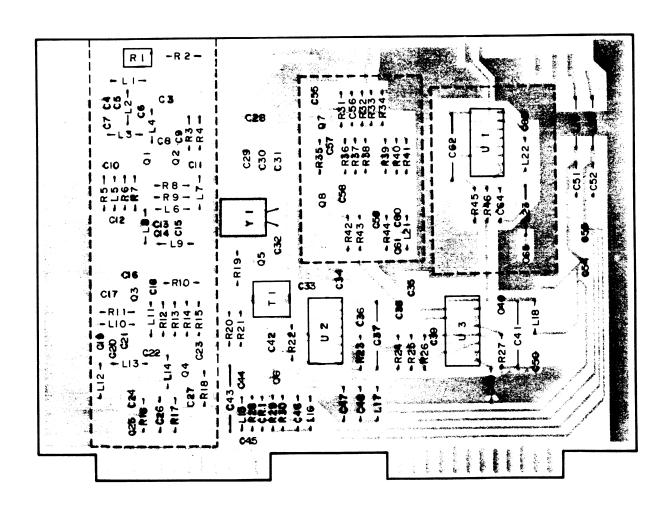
A8 Crystal Oscillator Board Assembly Component Locations.
